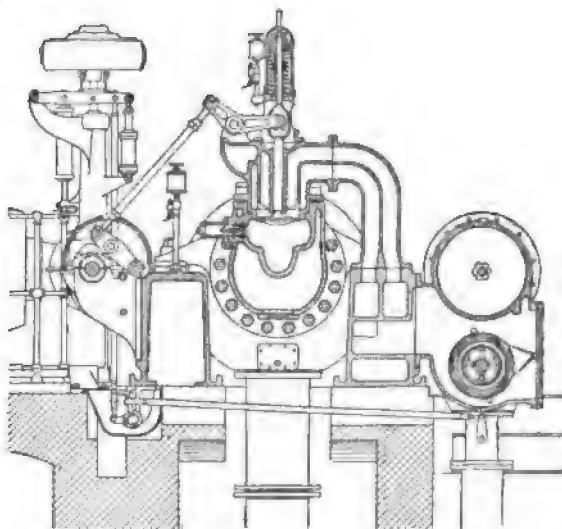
ARRANGEMENT OF CROSSHEAD-GUIDE IN THE KÖRTING ENGINE.
